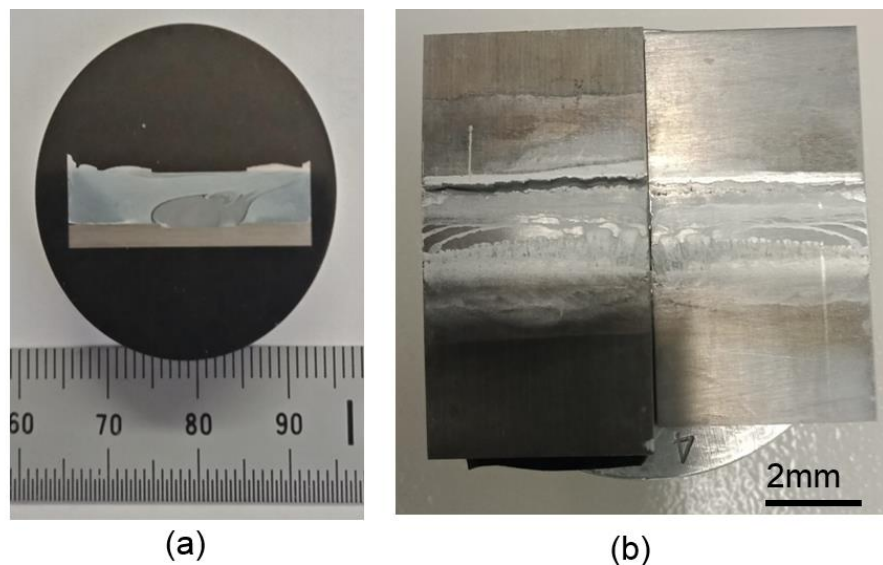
Samples prepared for SEM images: (a) Metallographic sample for cross-sectional viewing and (b) fractographic sample for fracture surfaces
